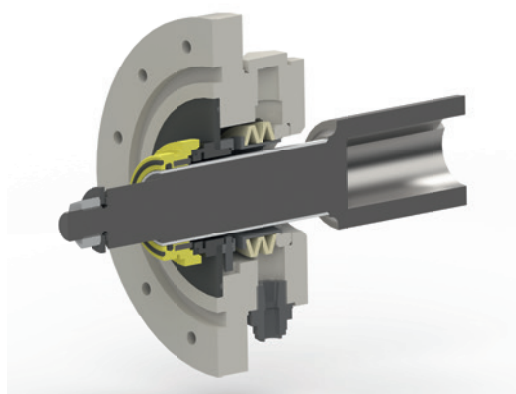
SINGLE MECHANICAL SEAL
